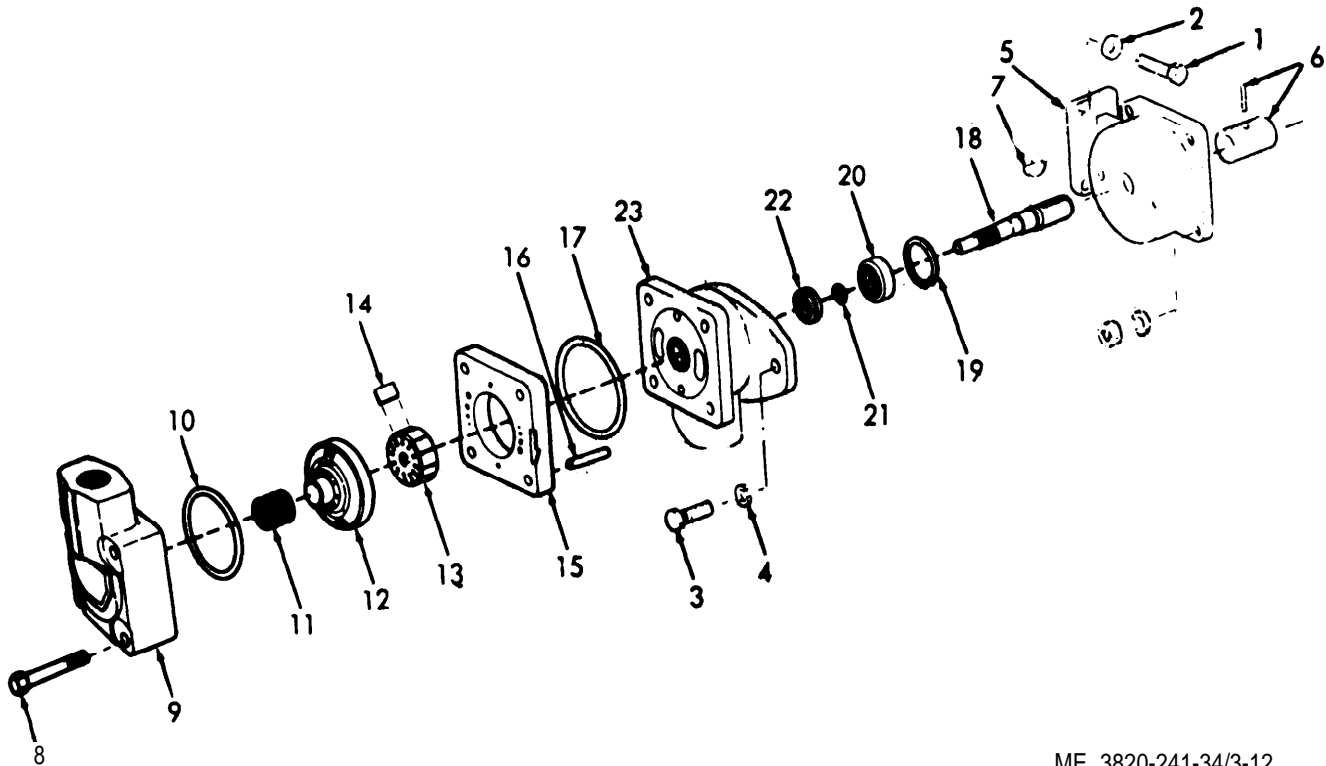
Hydraulic pump and drive coupling, removal and installation.
